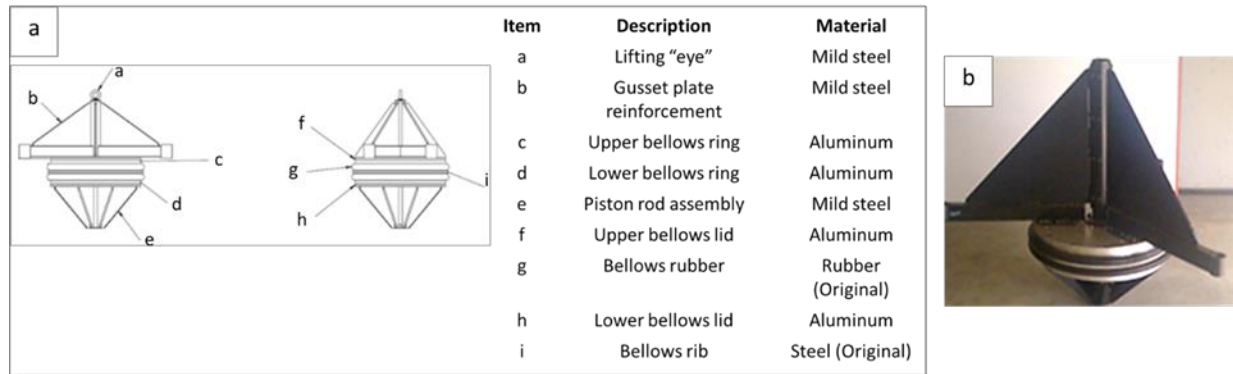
(a) Components of re-engineered air bellows; (b) re-engineered air bellows with gusset reinforcement.
